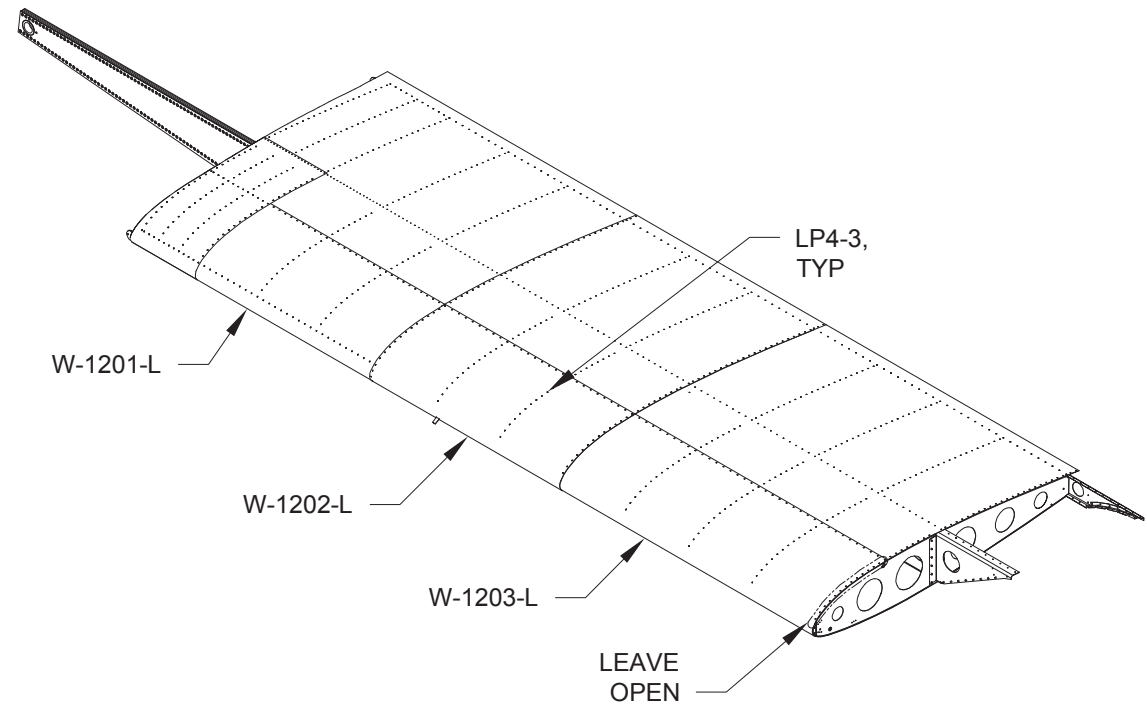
RIVETING MID AND OUTBOARD WING SKINS
